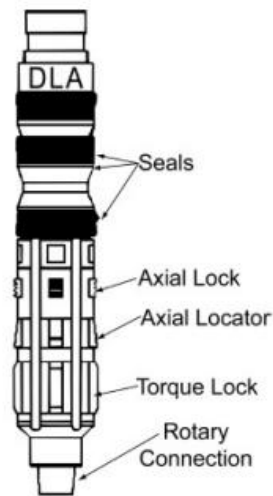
Drill Lock Assembly (Warren et al. 2001)
